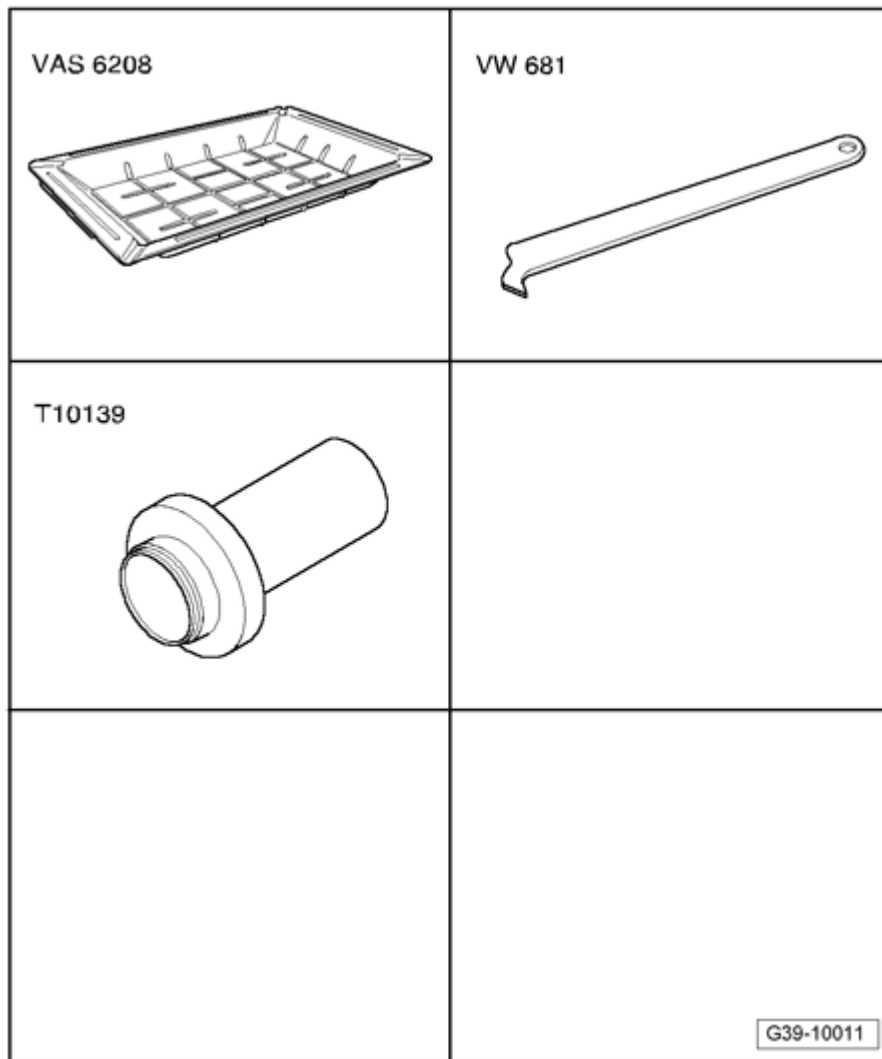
Identifying Special Tools - Final Drive/Transmission Housing Oil Seal, Replacing
